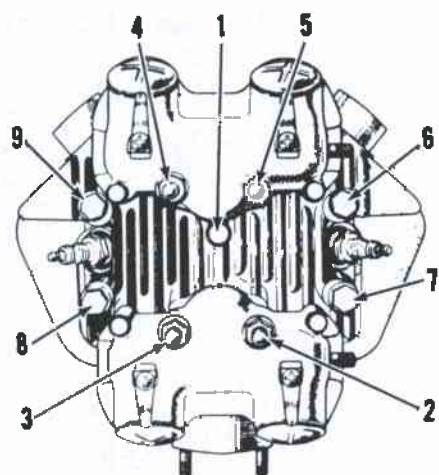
Cylinder head retaining screws and stud nuts should be tightened in sequence shown for 750cc models. Special nuts are used at locations (3, 4, 5 & 6) which accept rocker box screws.
